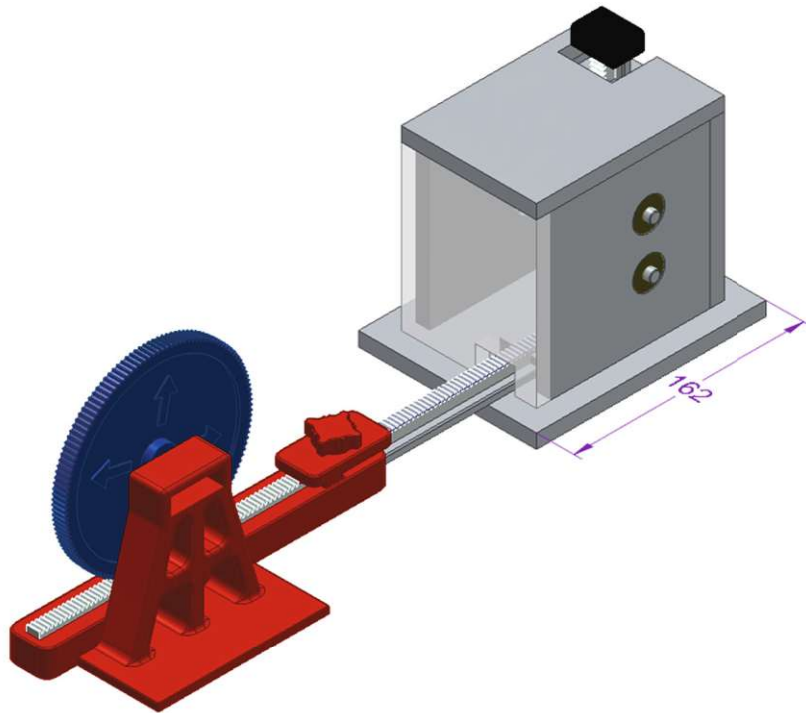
CAD assembly of the designed parts for the CM's functionality test.
